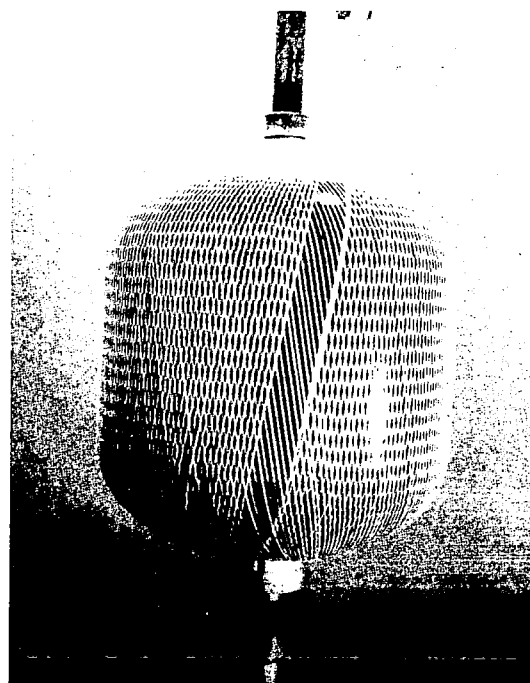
Rear View Just Before Mandrel has Completed a 360-deg Rotation
